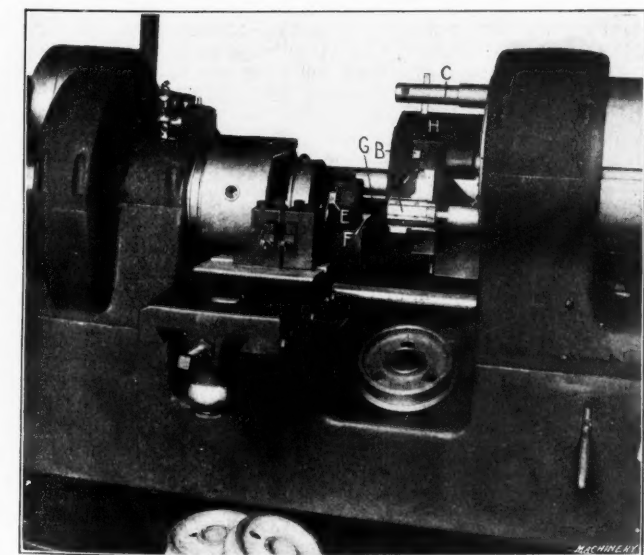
Cleveland Convertible Automatic Turret Machine having Special Equipment for Turning Flanged Wheel C, Fig. 1
